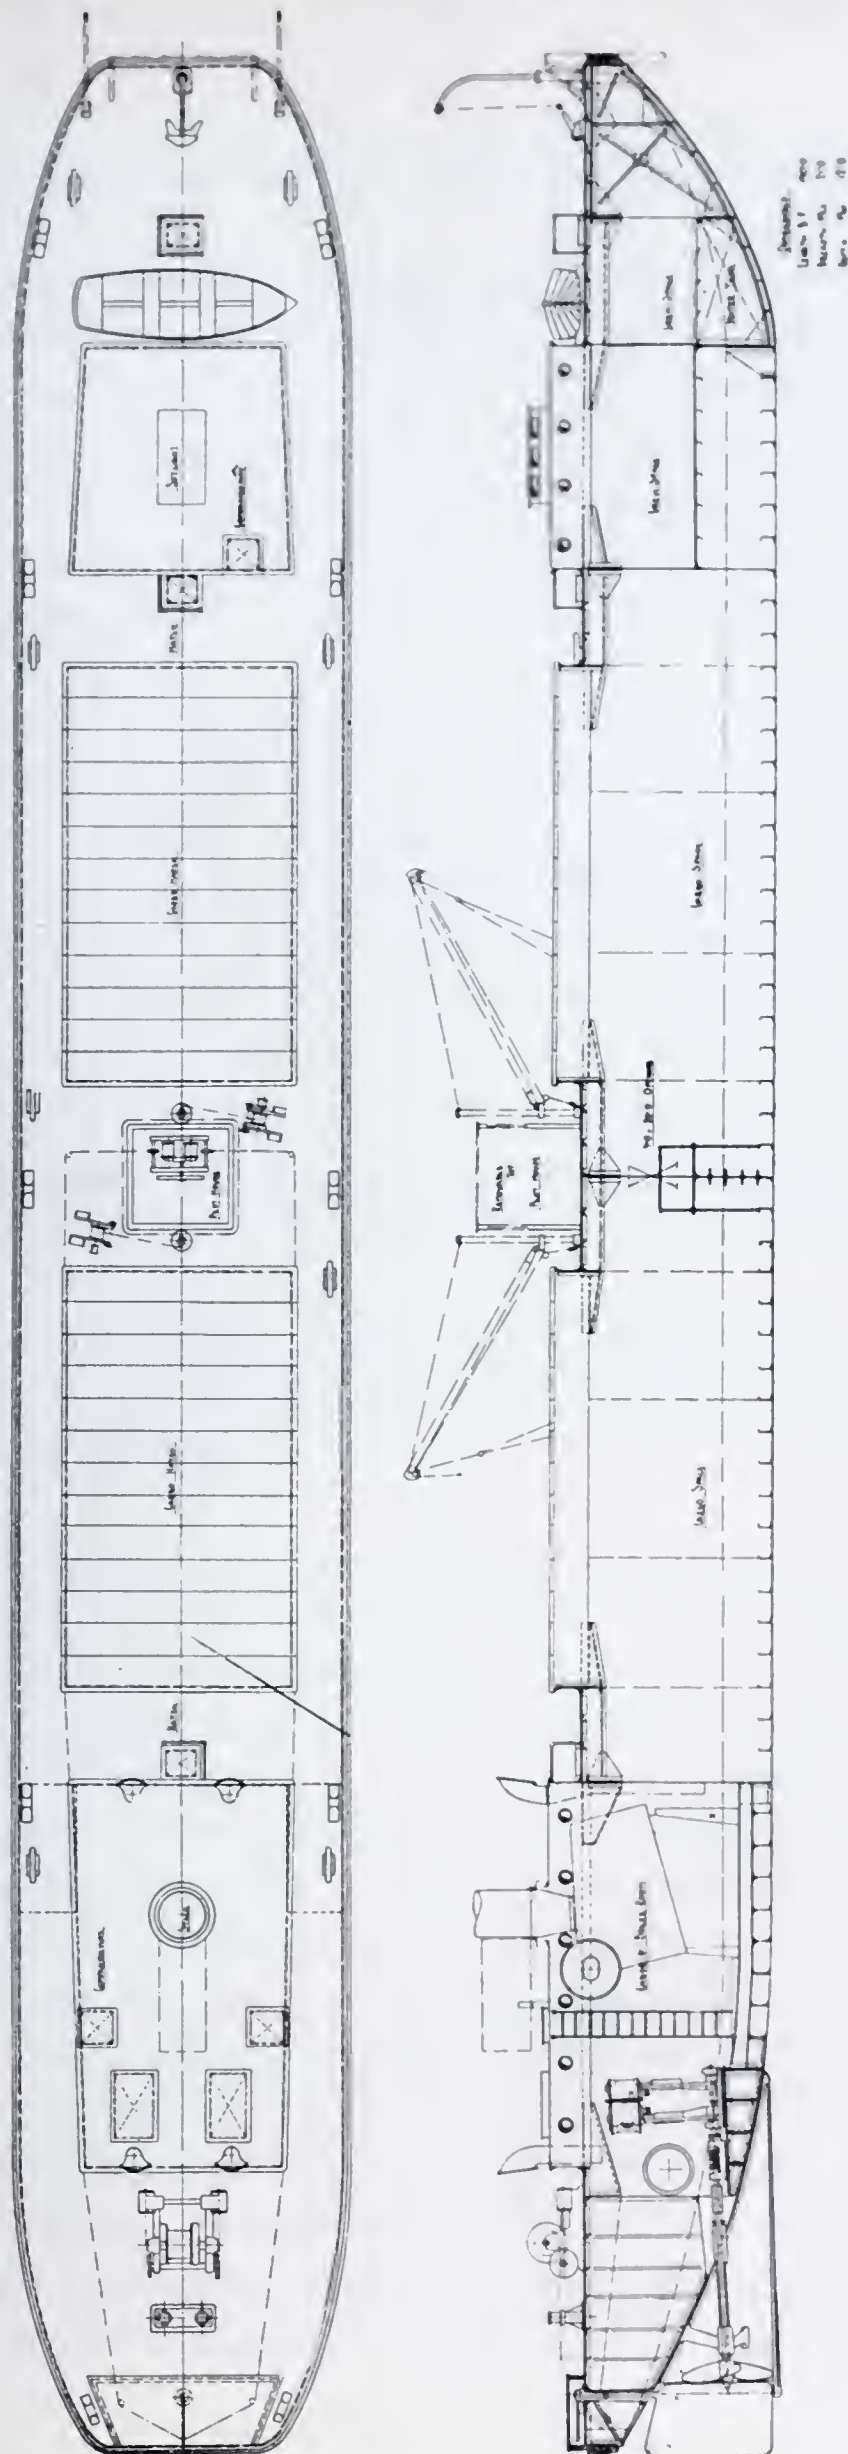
Steel Cargo Towboat for Erie Canal. Inboard Profile and Deck Plan.
